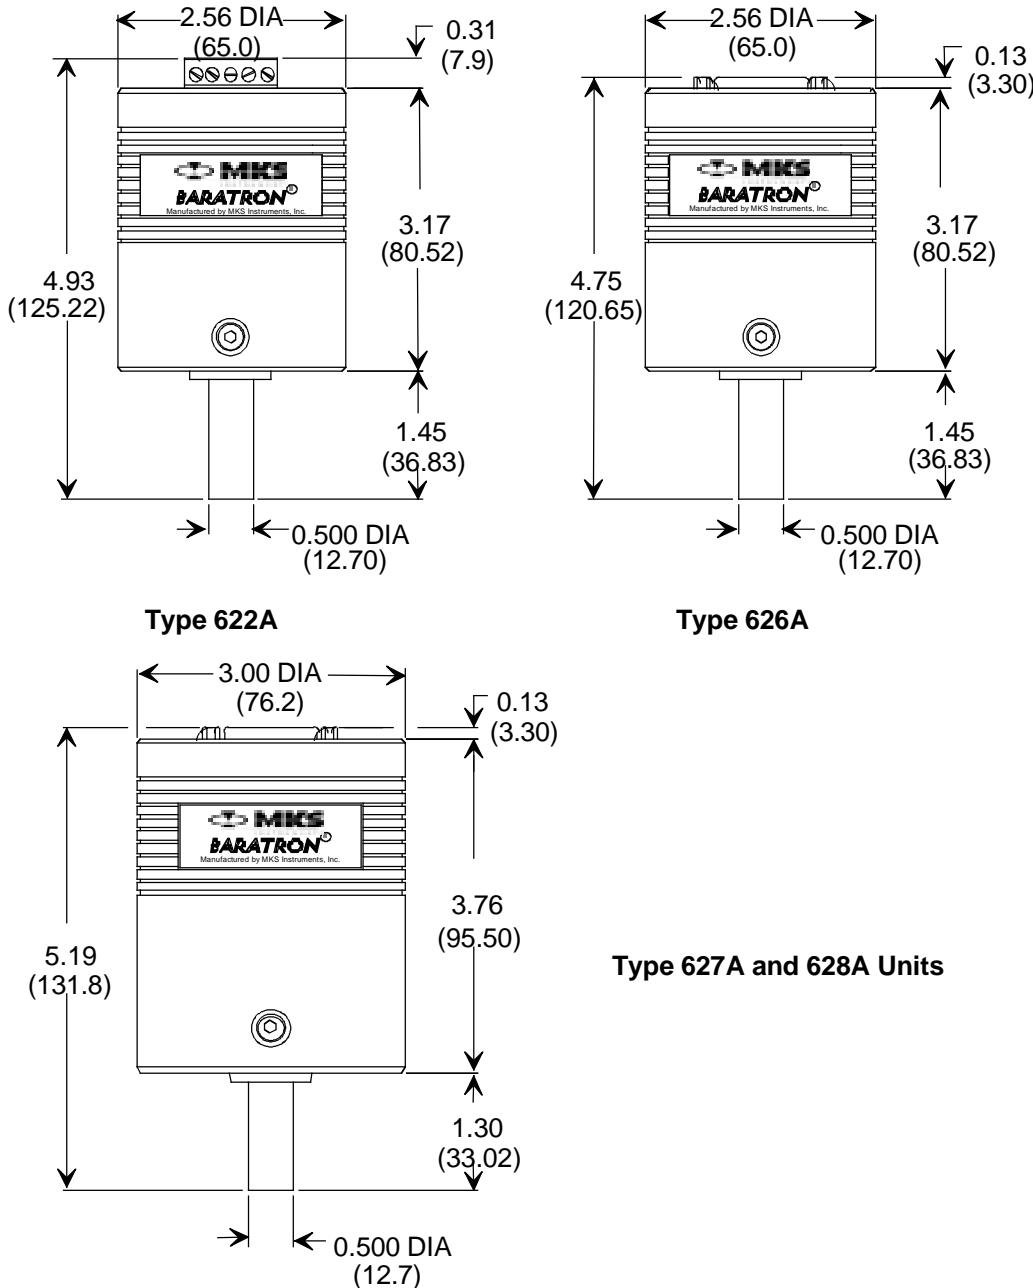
Dimensions of the Types 622, 626, 627, 628, and 629 Transducers
